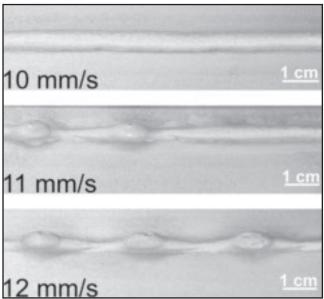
Top view of GMA welds produced using 6.3 kW welding power, argon shielding gas, and at various welding speeds.
